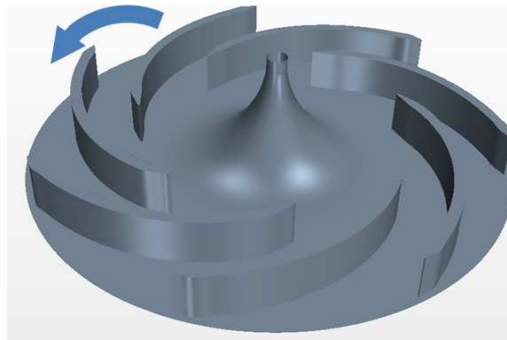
11: ERCOFTAC centrifugal pump 2D blade impeller.
